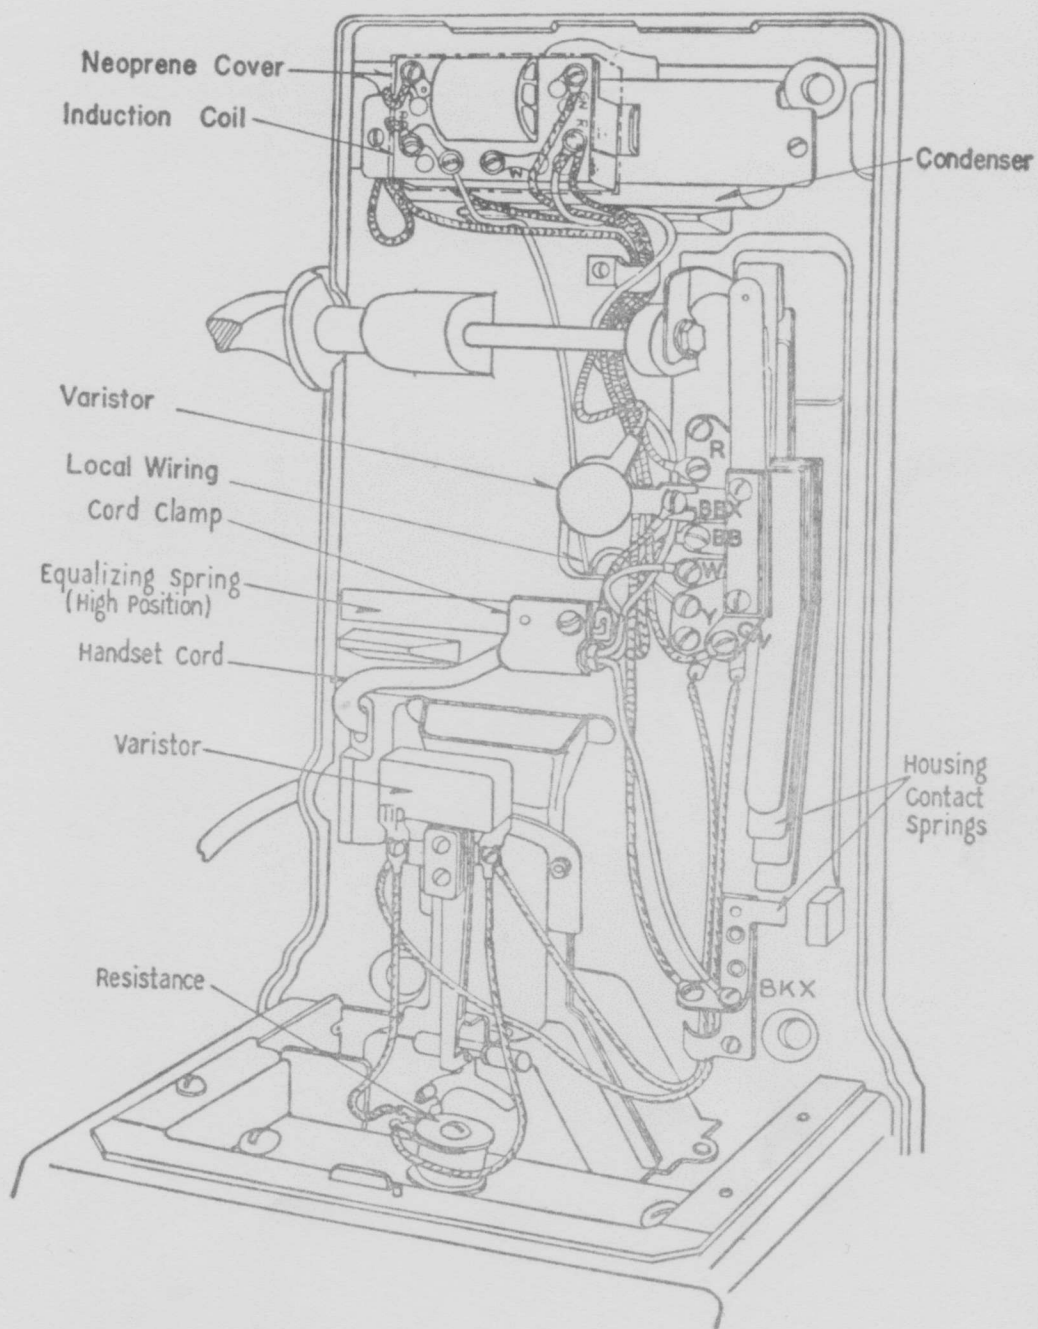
183-type Coin Collector—Lower Housing and Backplate Assembly
